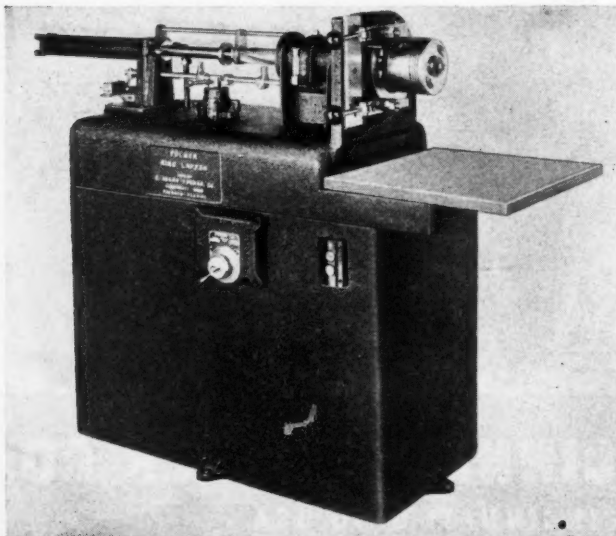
Fulmer Hydraulic Piston-ring Lapper
